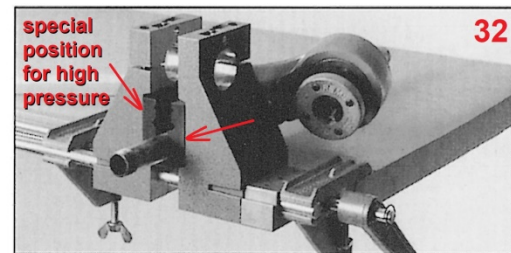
The drilling machine can be fitted on the right or left in the round holders of the system jaws (b2). Tighten up fixing screw (b4).
